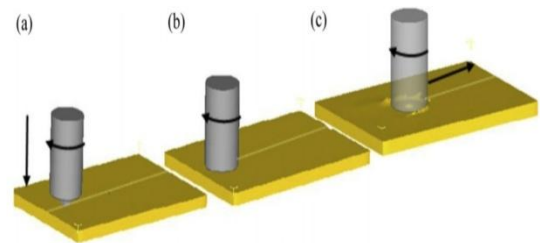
Schematic stages of FSW process (a) plunging (b) dwelling (c) welding
